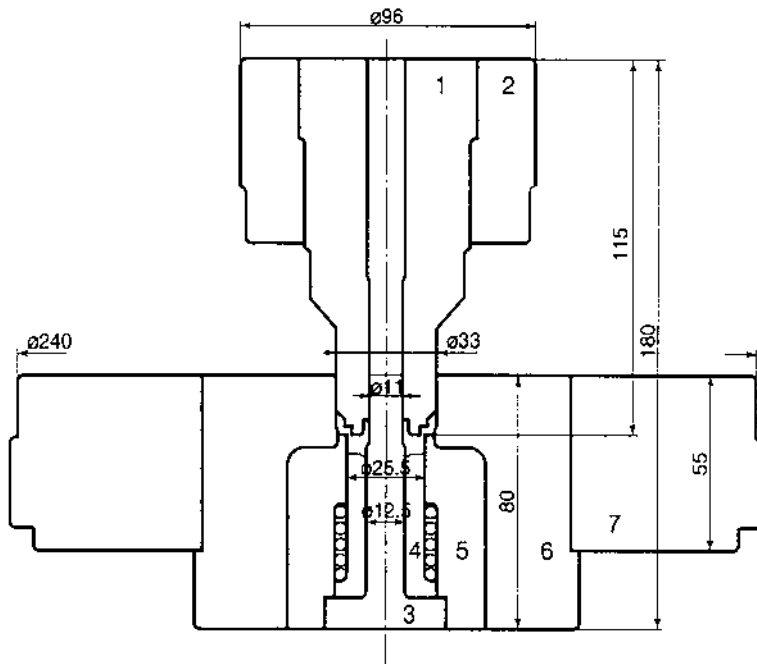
Tool set up for cold forging of hub of personal computer, Miyamoto Industry Co. 1. Punch, H11=SKD6; 4,5. Die, M2=SKH51; 6. Container, D2=SKD11.
